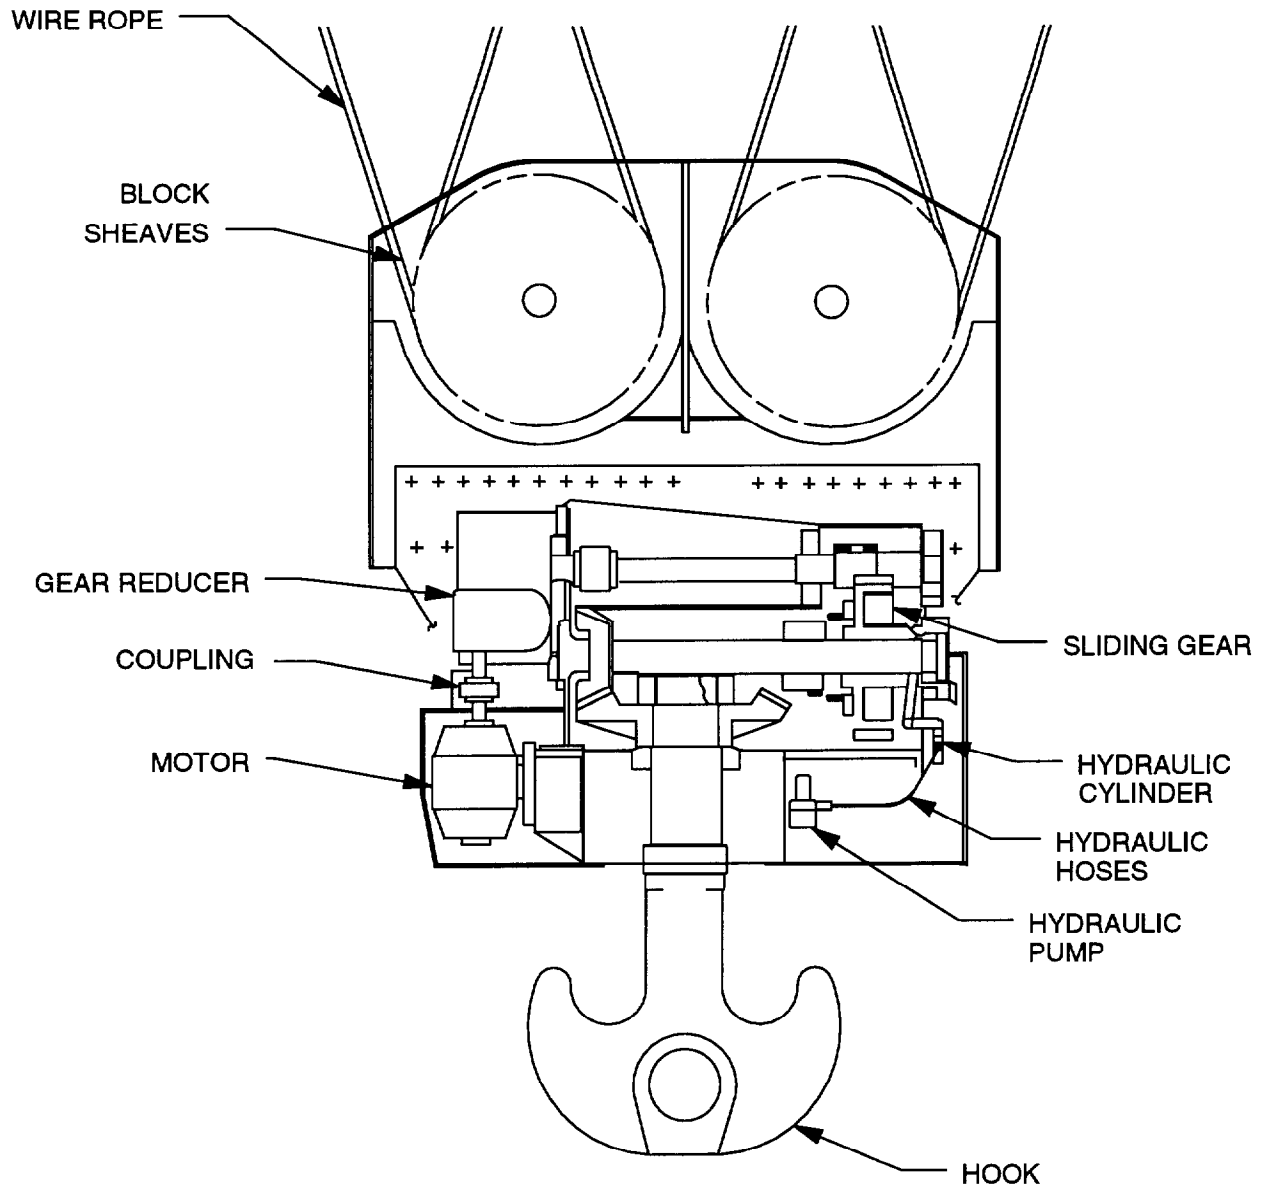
LOAD BLOCK FOR THE MAIN HOIST
